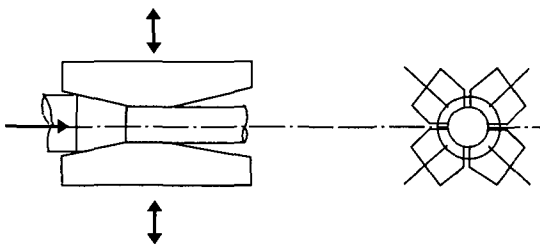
A schematic showing the arrangement of forging dies in radial forging machine
